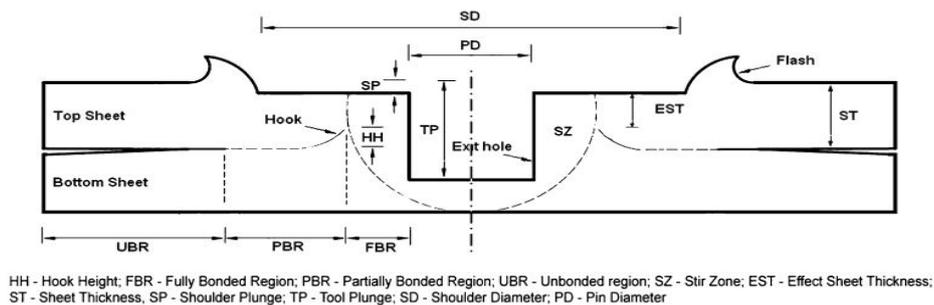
Schematic cross-sectional view of a friction stir spot weld [2].
